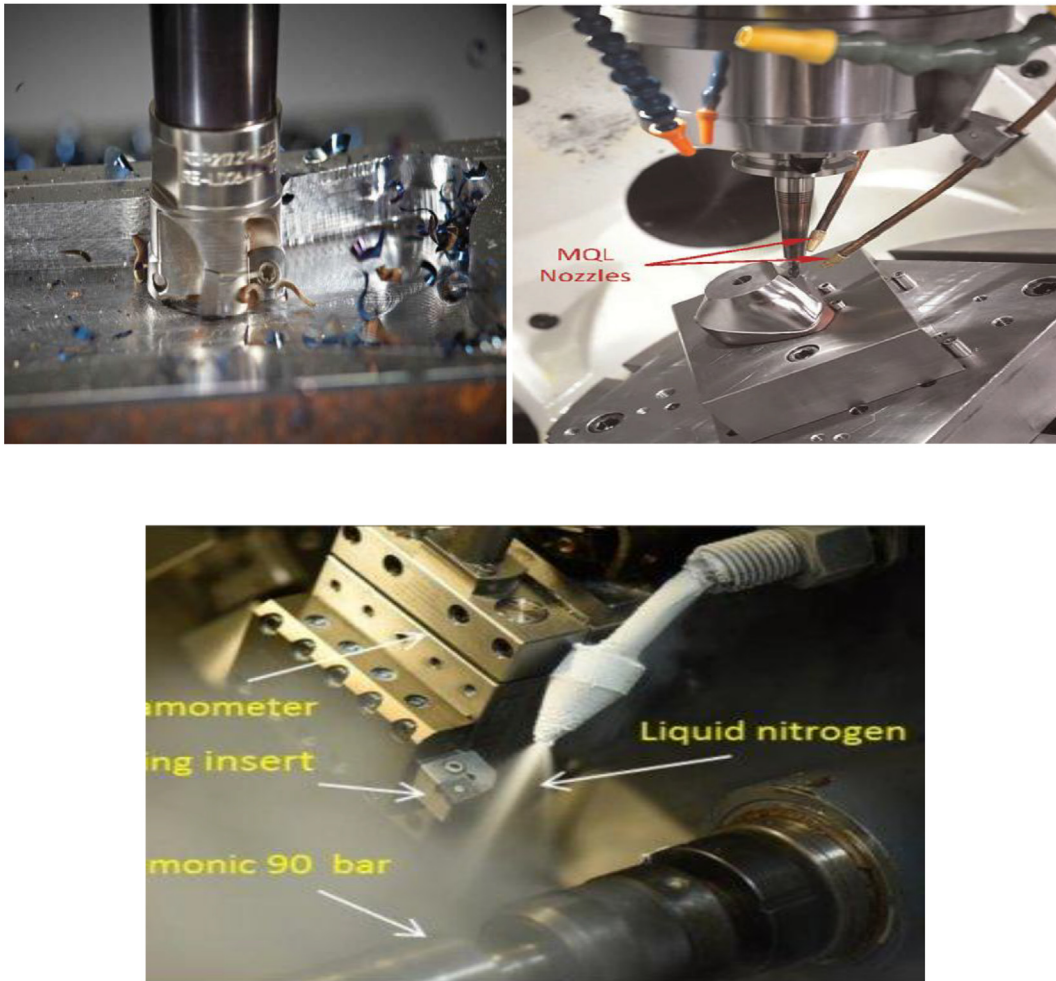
(a, b & c) Dry machining [16], MQL machining [18] & Cryogenic Machining System [19]
